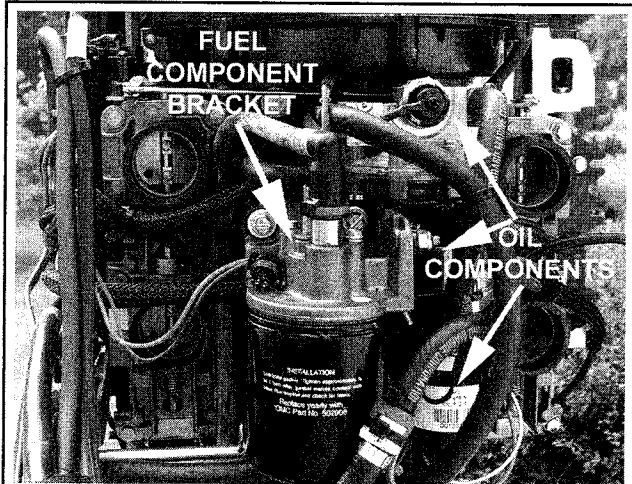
The oil components are mounted to the powerhead and fuel component bracket
